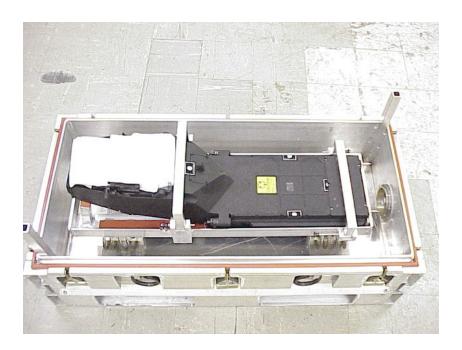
HUD Container w/Cover Removed showing Cradle System and Guide Posts
